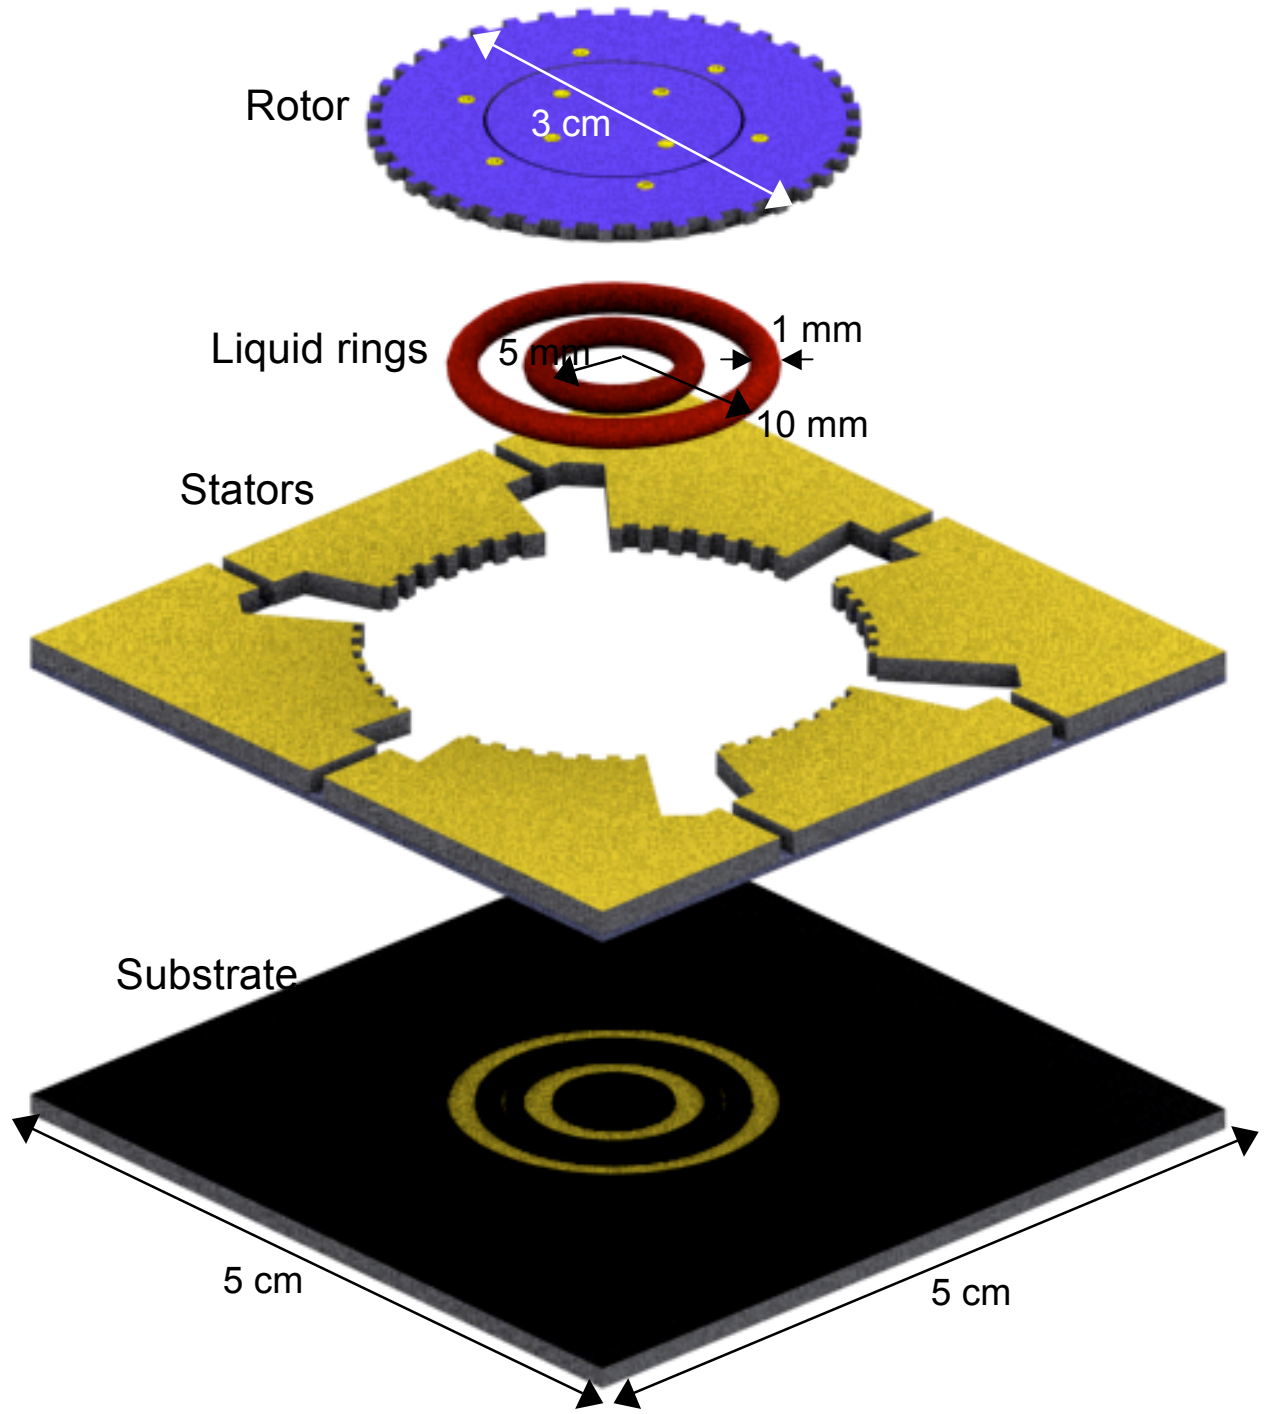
Exploded view of the side-driven rotary stage on conductive liquid rings.
